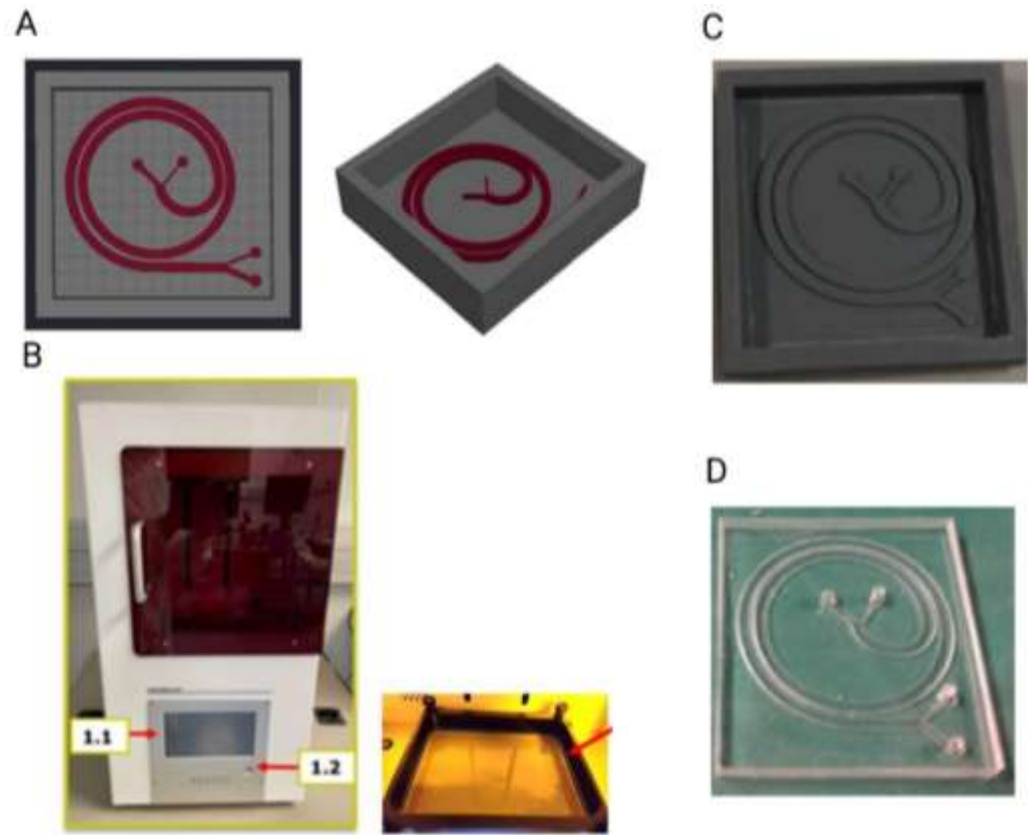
Master fabrication by 3D printing. A) Spiral device designed using AutoCAD® and 3D modelling of spiral microfluidic master using AutoCAD®. B) Solus DLP 3D Printer printing the spiral master. C) Spiral microfluidic master fabricated by 3D printing. D) PDMS replica from de 3D printed master.
